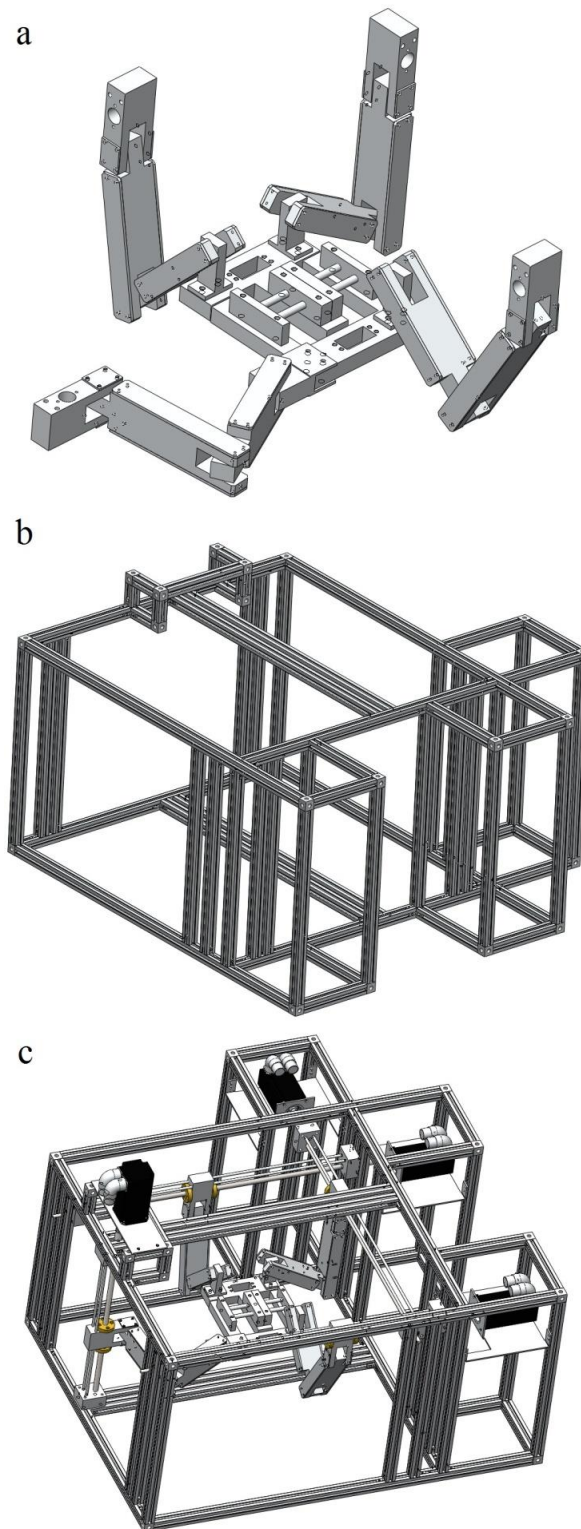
a) Fully assembled prototype kinematic chains and moving platform with pin covers. b) Fully assembled prototype cage CAD design. c) Fully assembled prototype CAD design.
